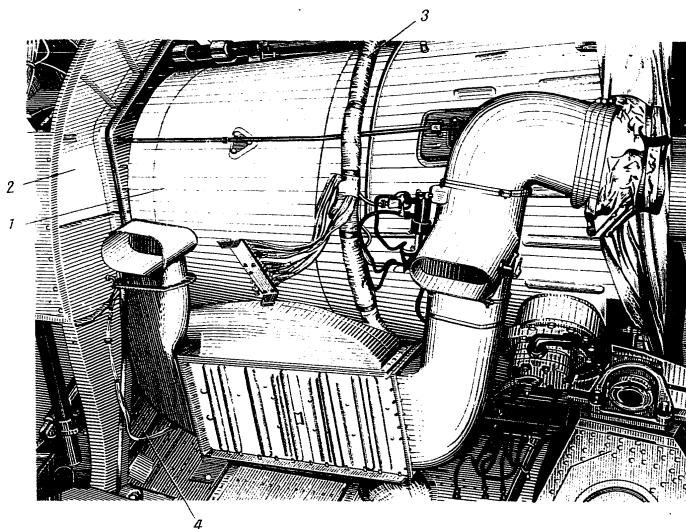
ATTACHMENT OF FIRE BULKHEAD ON J-25B ENGINE
